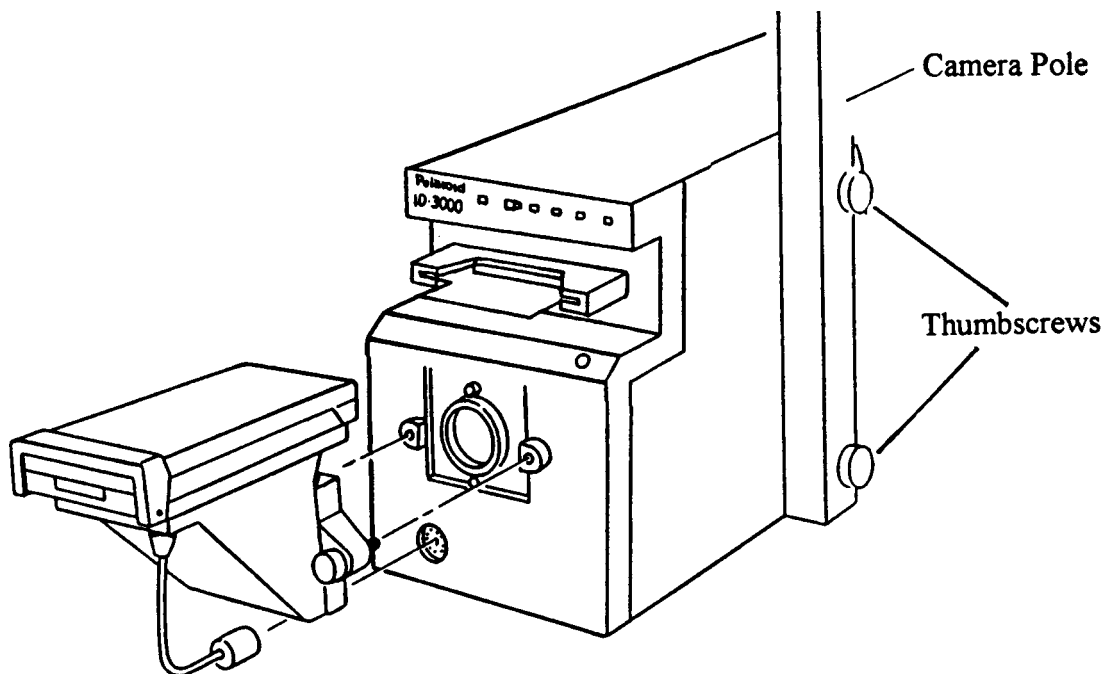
Mounting Camera, Strobe and Bracket Assembly
